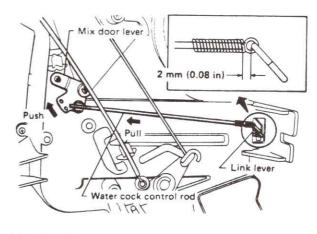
Water cock control rod adjustment (Sec 32)
